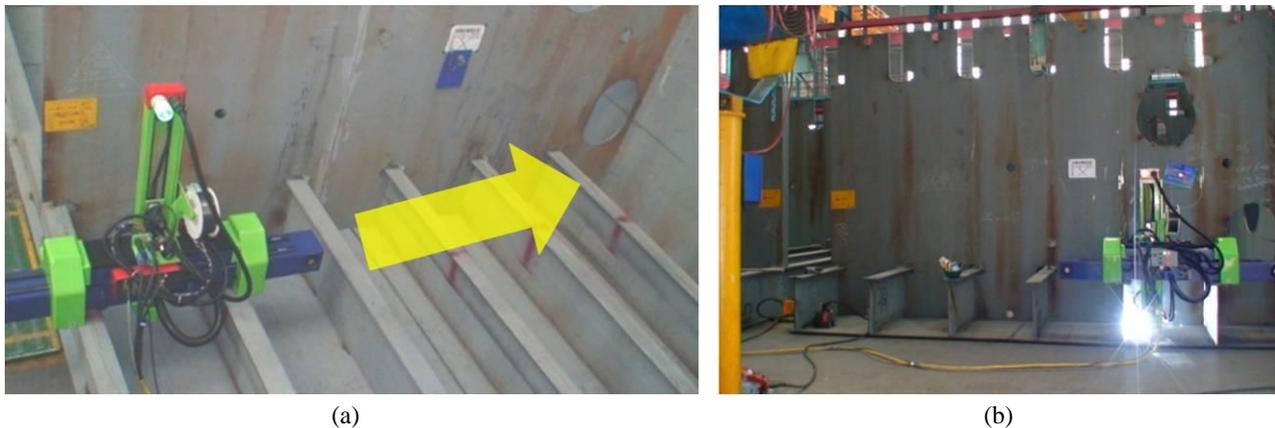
Field test of the mobile welding robot: (a) before moving longitudinal direction, (b) welding after moving longitudinal direction.
